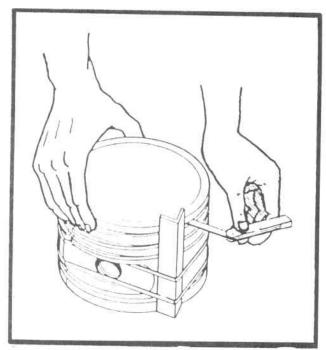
A. INSPECTING RING SIDE CLEARANCE.
